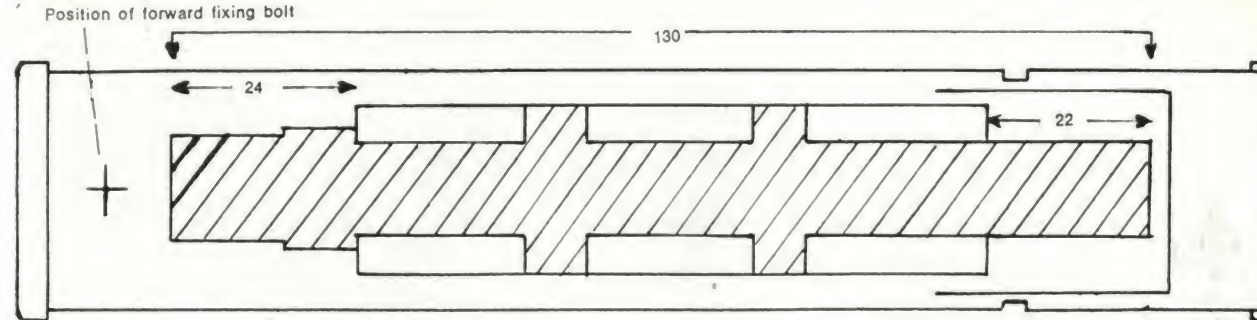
Plan view of Airfix 'Battle of Britain' footplate—remove shaded area
